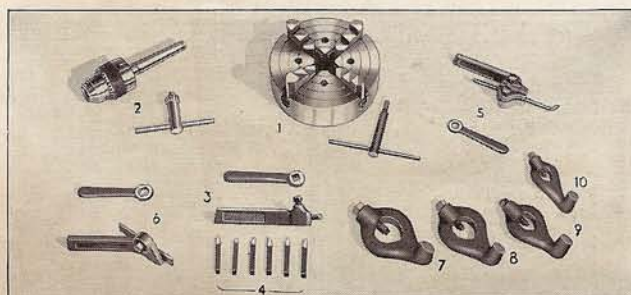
No. 105-WT Chuck and Tool Assortment for 9-inch "Workshop" South Bend Lathes.
